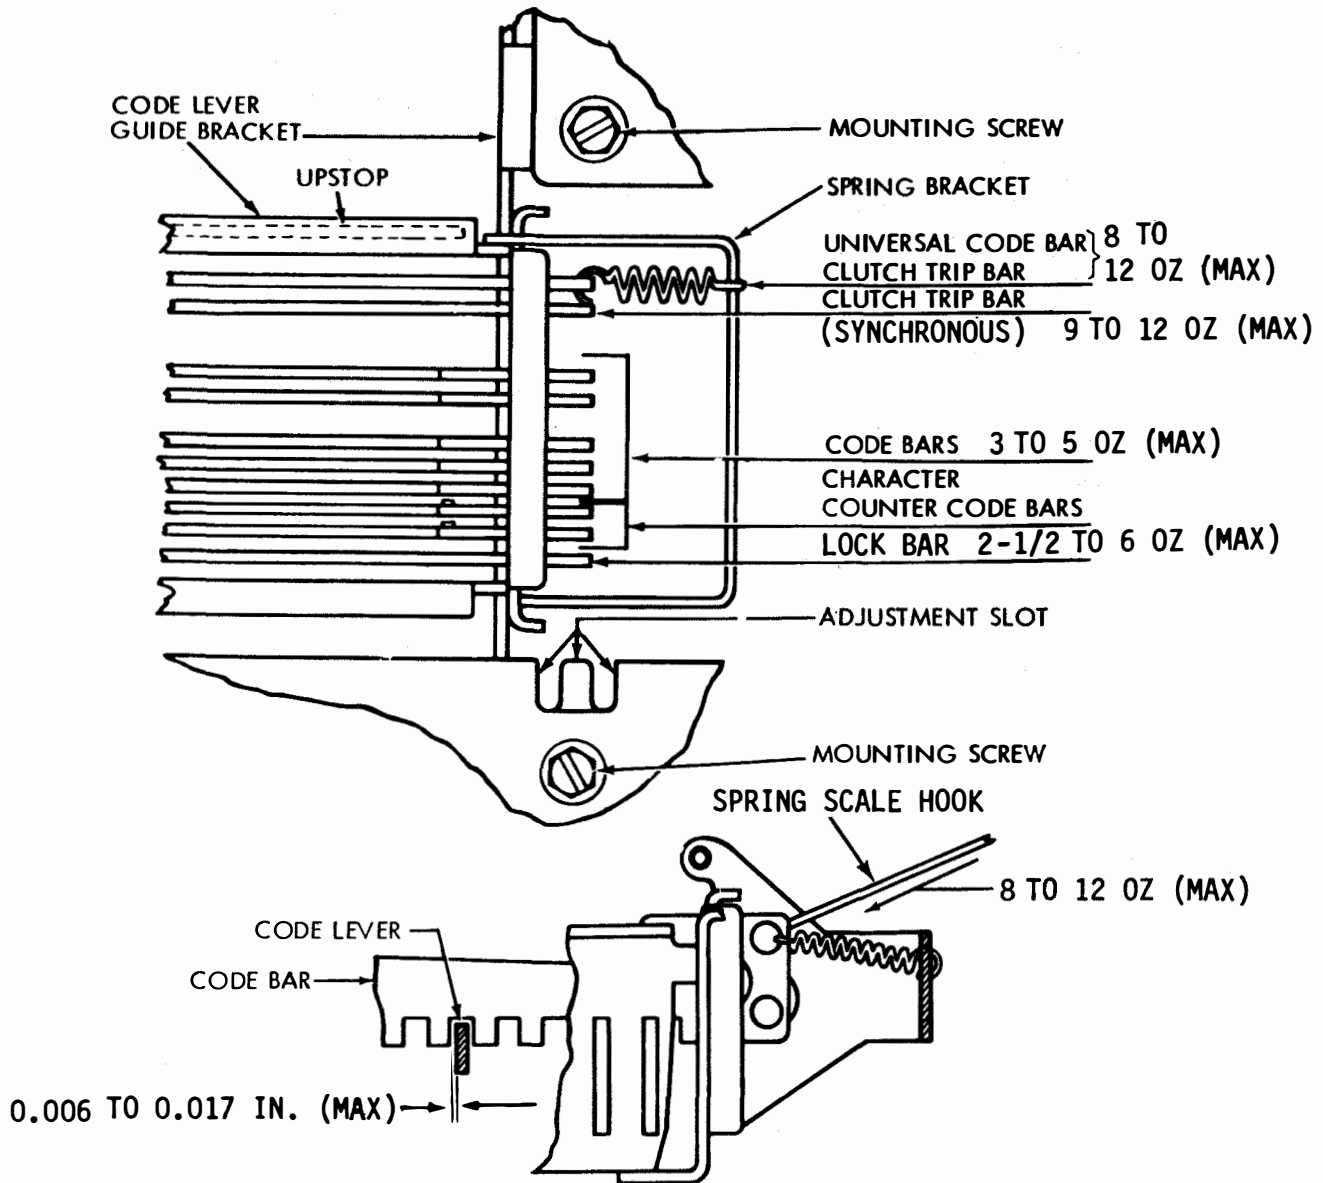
Code Bar and Code Lever Clearance Clutch Trip Bar Spring, Universal Code Bar Spring, Code Bar Spring, and Lock Bar Spring
